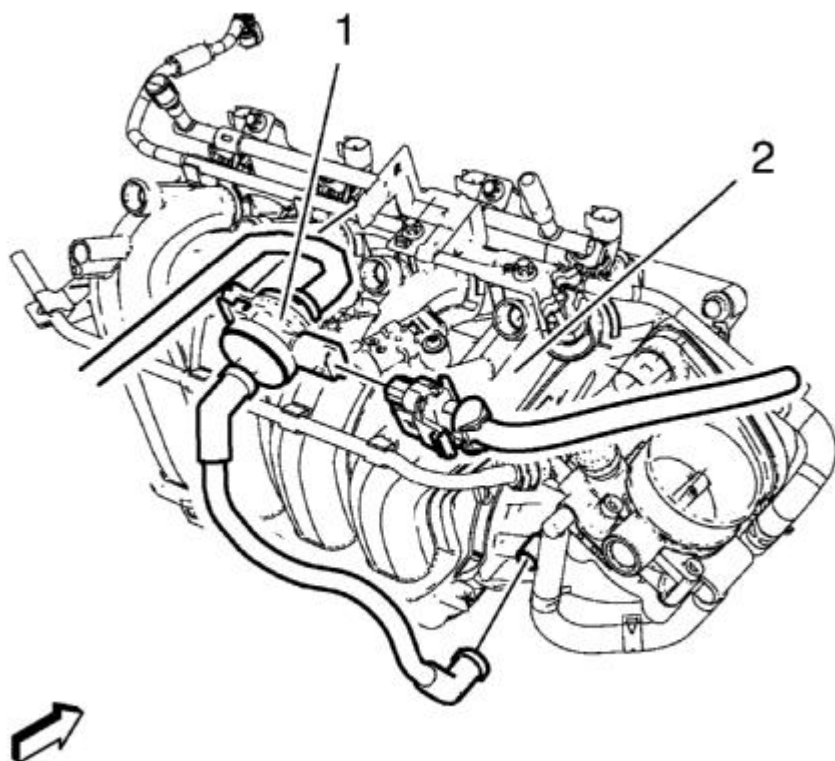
Evaporative Emission Canister Purge Solenoid Valve, Rubber Mounting And Intake Manifold
